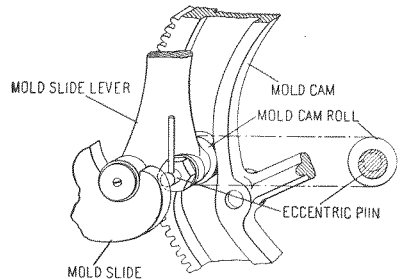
Mold slide lever in position to operate the mold slide, and also an eccentric pin and adjustment for the roll which moves the mold slide forward and back, in order to take up a slight wear.
